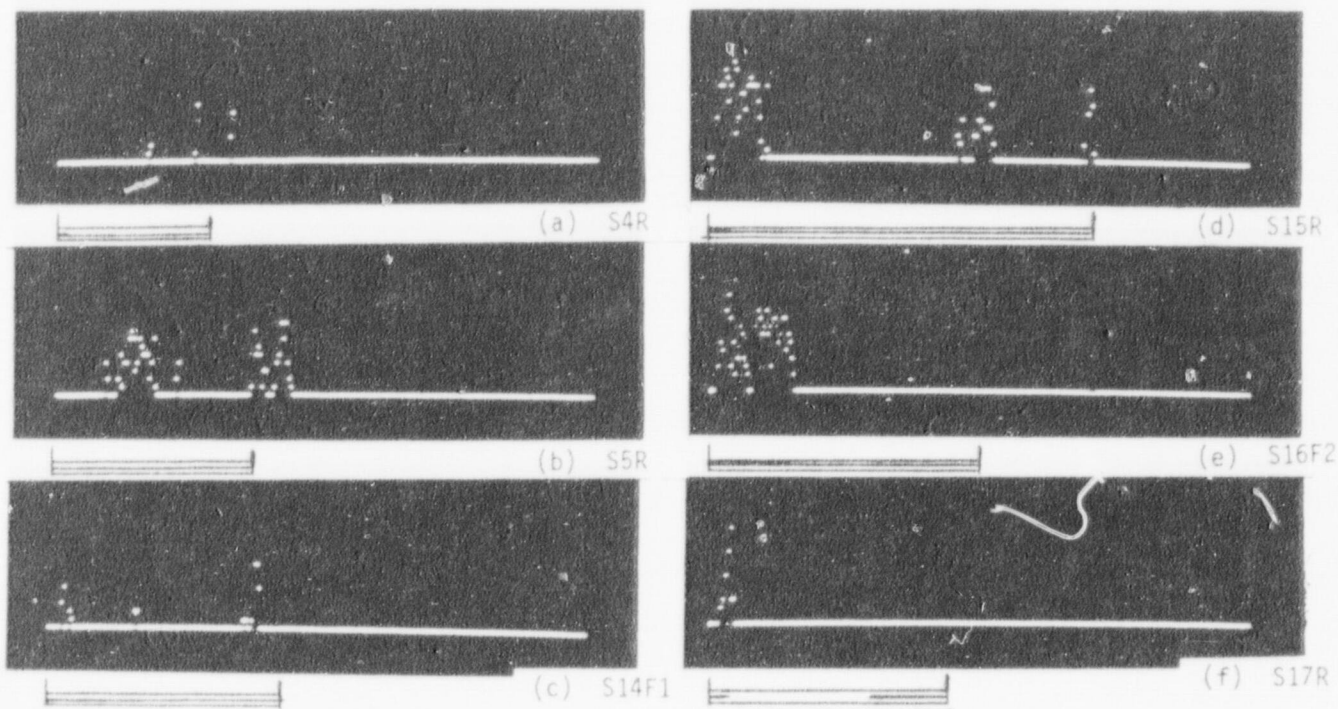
DETECTION OF INCOMPLETE PENETRATION DURING GMA WELDING OF A106 PIPING-TYPE STEEL
